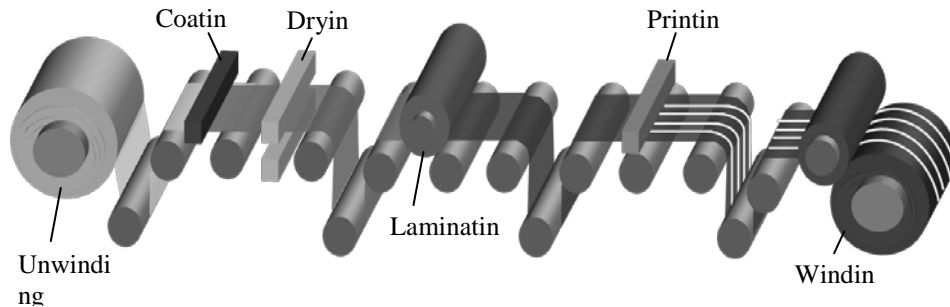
Roll-to-Roll-Printed-Electronics manufacturing system
